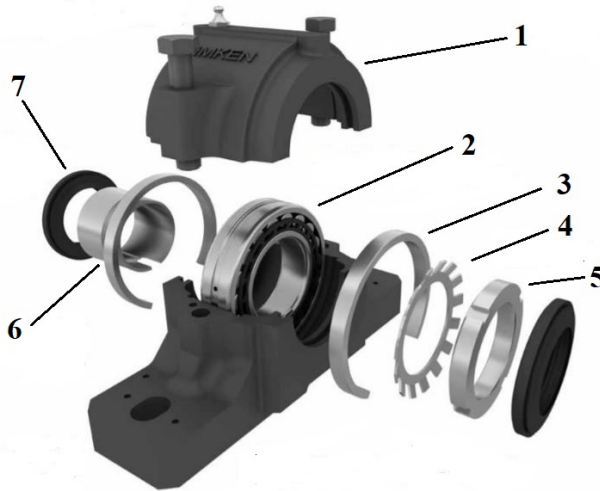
Design of plummer block: 1 - split-block housing, 2 - bearing, 3 - locating ring, 4 - locking plate, 5 - locknut, 6 - adapter sleeve, 7 - seal [5]
